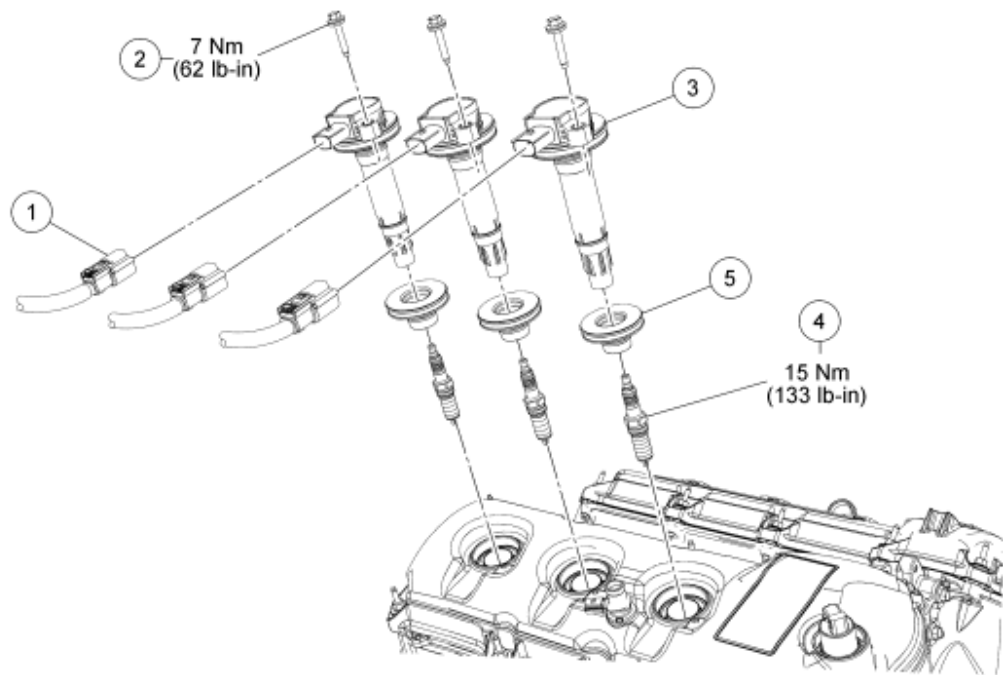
Identifying RH Side Engine Ignition Components (With Torque Specifications)
